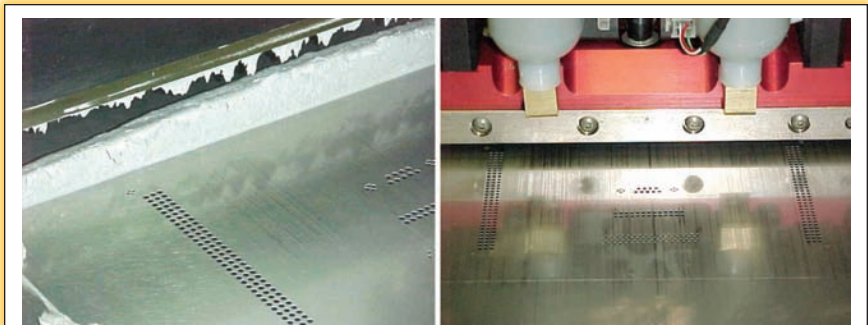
Typical solder paste bead in front of a metal squeegee blade (left). If through-hole parts were positioned on the right side of the board for the print stroke, this is where you might notice changes in the width of the paste bead over time. Sealed head printers monitoring the pressure inside the print head and via software adjust the process parameters or warn the operator to top up the paste (right).
